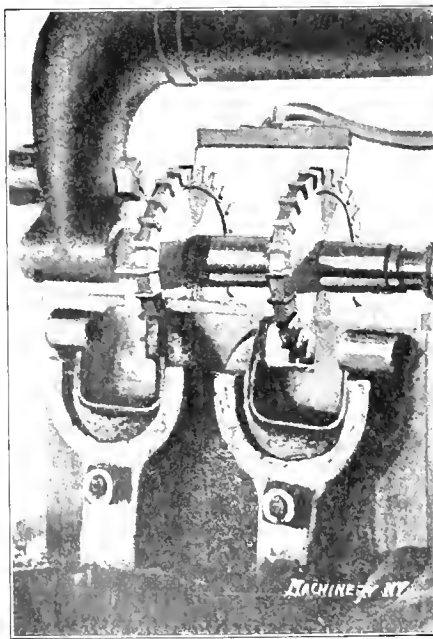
Fixture which holds Two C-clamps while Faces are being milled
